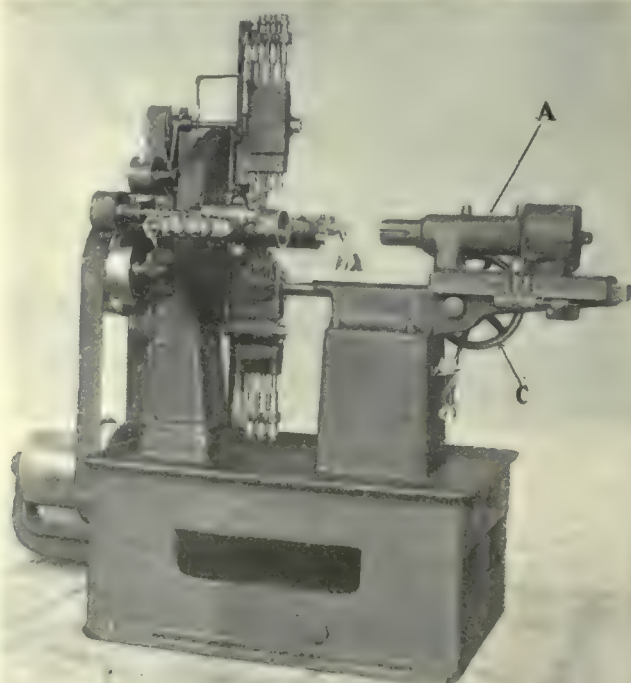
REAR VIEW OF DRILL SHOWING AIR VALVE ON TAILSTOCK.
